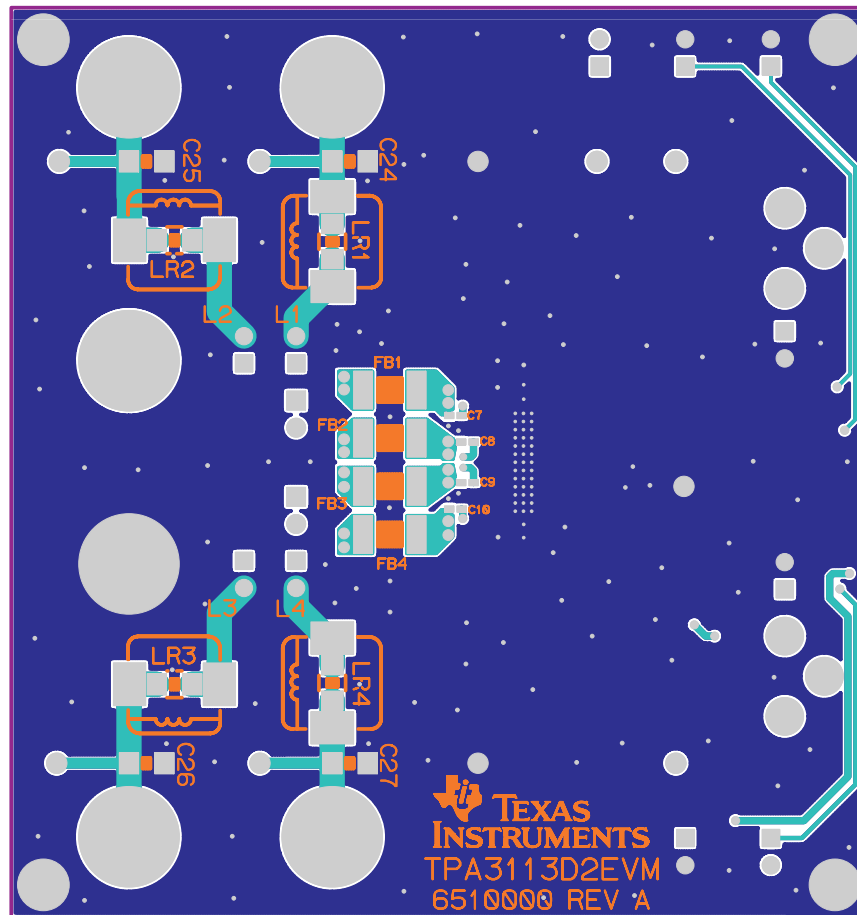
TPA3113D2 EVM – Bottom Side Layout
